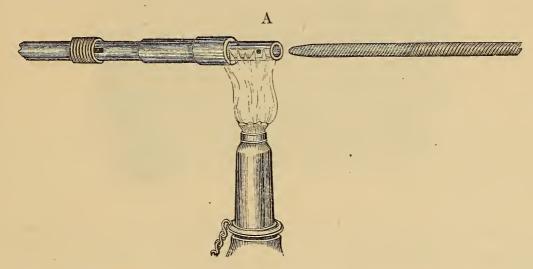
Fig. A illustrates a method by which those who cannot return the parts to us can attach a cable to the spindle of the hand-piece themselves. The cable, as obtained from us, has the end to be inserted in the spindle tinned, ready for soldering. Place a single drop of muriate of zinc (made by dissolving zinc in muriatic acid to saturation) in the hole in the end of the spindle; then a piece of soft solder not larger than a canary-seed; then hold the end of the spindle over a spirit-lamp, as shown in Cut, and when the solder flows, insert the tinned end of the cable and hold it in position until it chills, being careful not to overheat the cable, so as to draw the temper of the wire. The flame should not come in contact with the cable.
